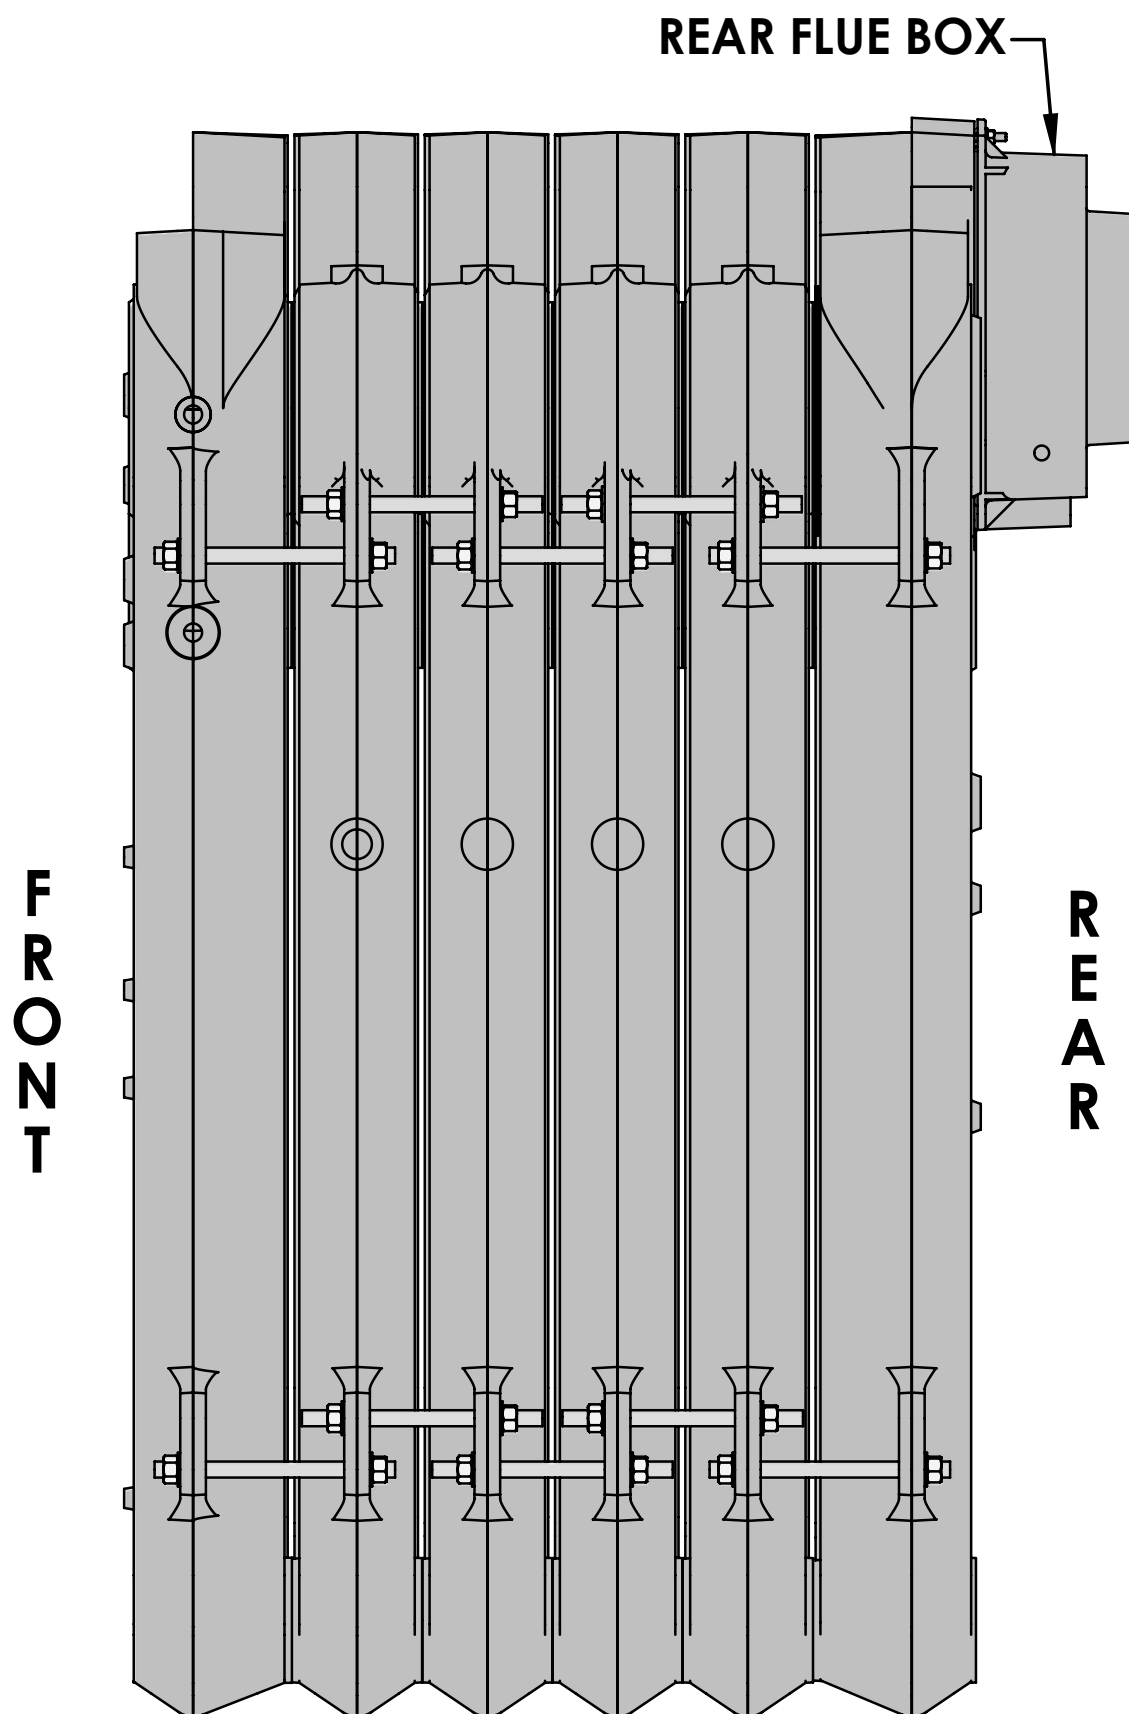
Series LC™ Boiler Assembly – Right Side View
